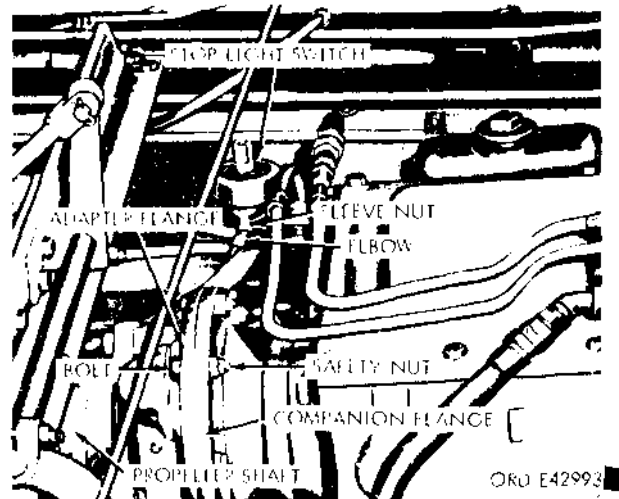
View of right rear section of transmission and transmission-to-transfer propeller shaft.
